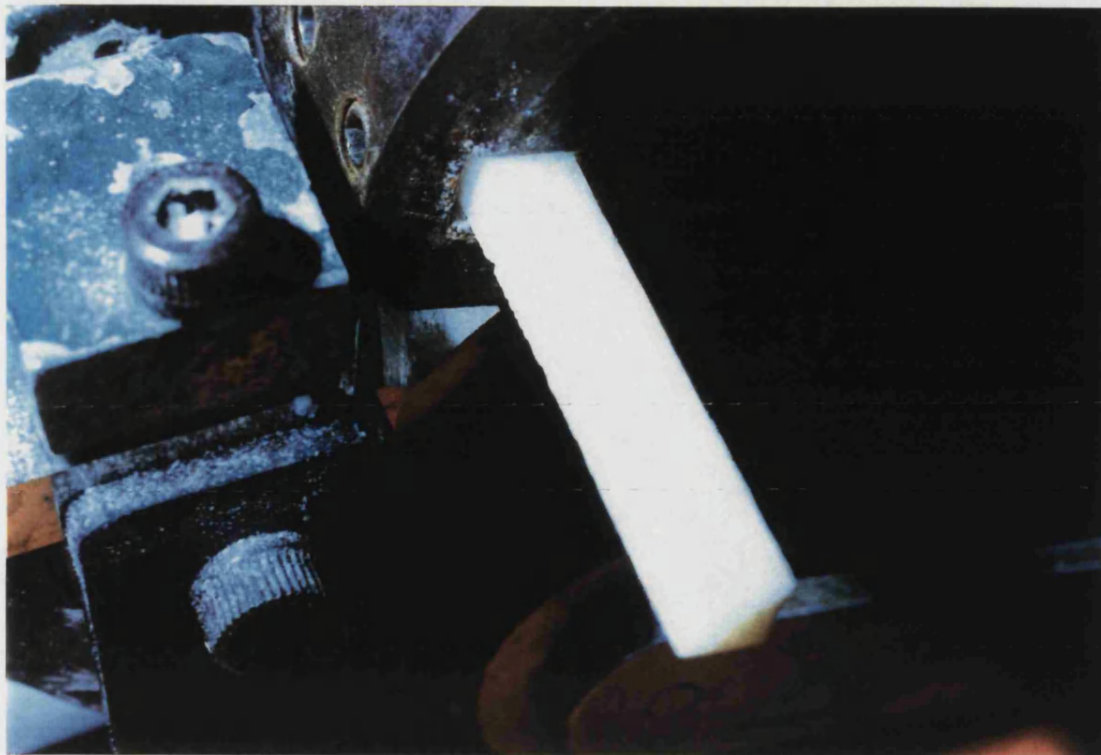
Notching Jig for Rapid Fracture (Impact) Tests - Top View.
